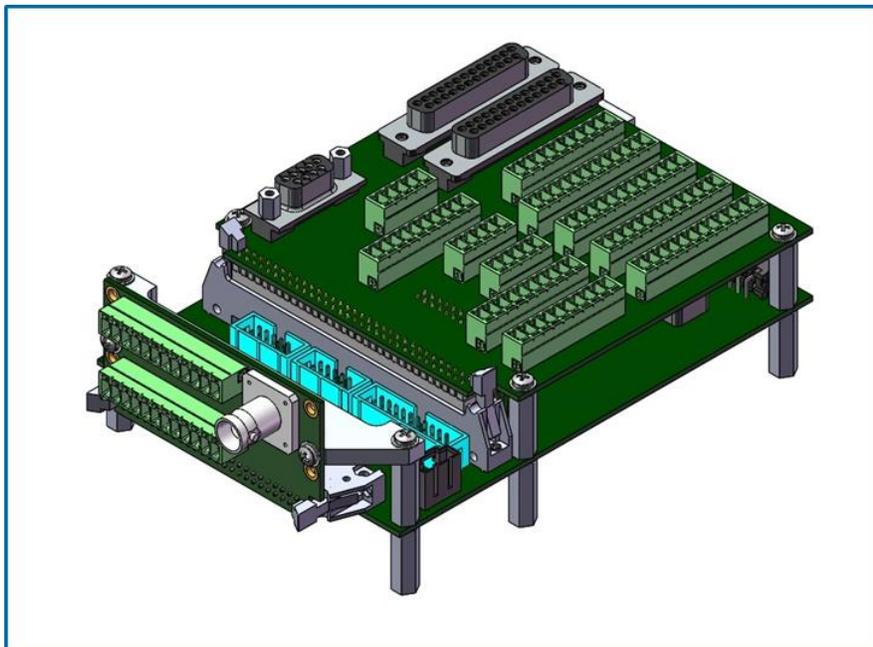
SMC with laser adaptor and auxiliary I/O module
